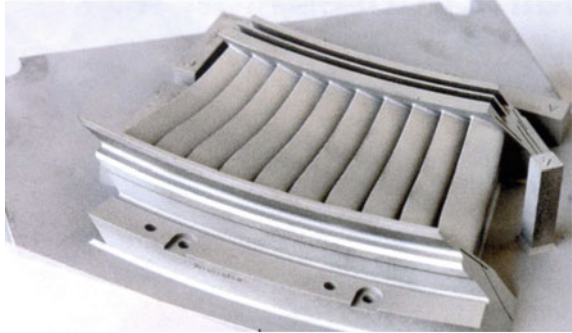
The first test piece produced on the M2 curing machine (Courtesy NASA/MSFC/Andy Hardin)
